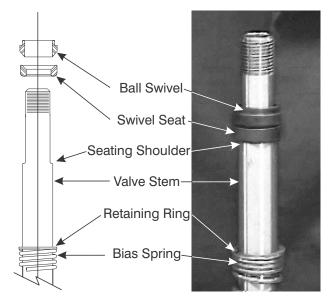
Install Lower Swivel Seat and Ball Swivel Half.
